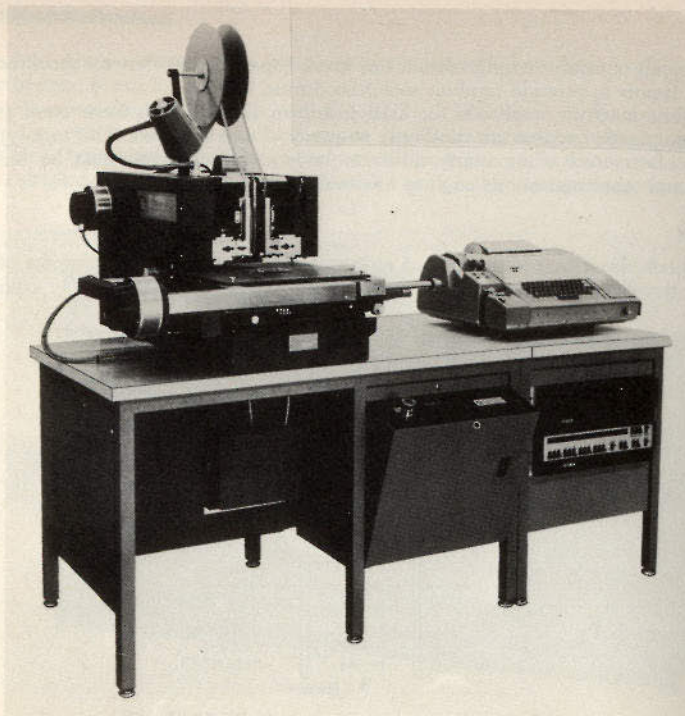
VCD insertion system with computer control. A typical assembled board is shown in Fig. 11.14.
